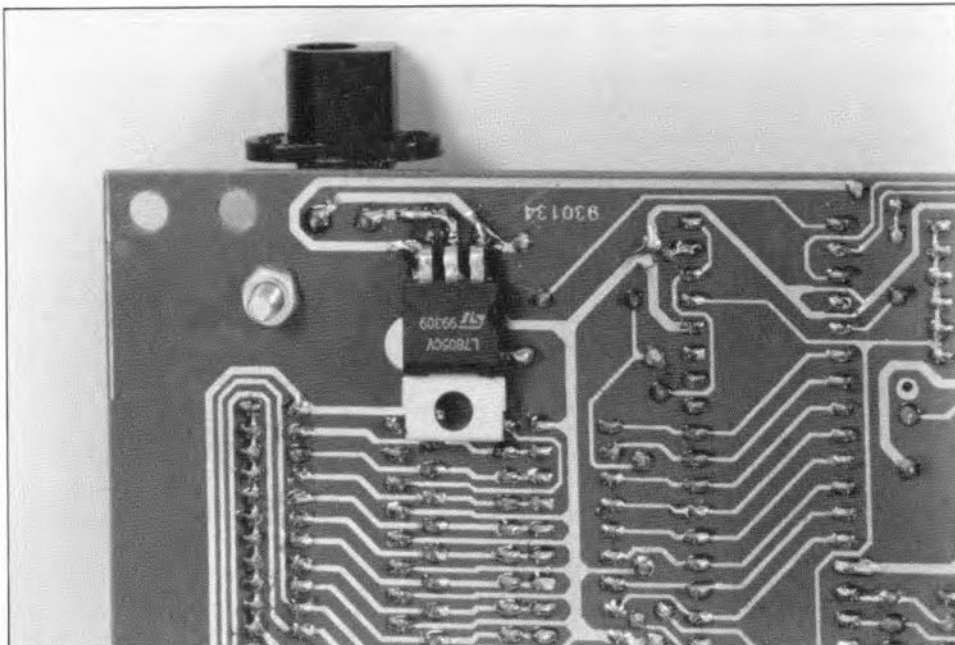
Unconventionally, voltage regulator IC9 is fitted at the solder side of the board if the plastic enclosure mentioned in the parts list is used.
